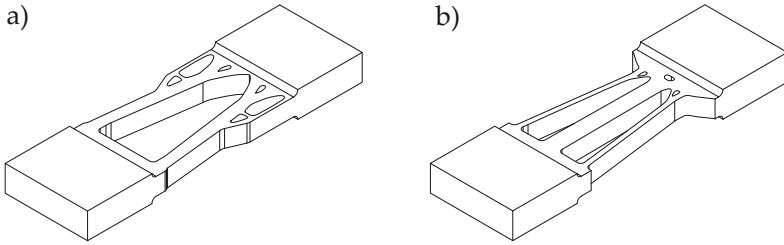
CAD models for 3D printing of designs a) and b) with equal mass, thickness and clamping area
